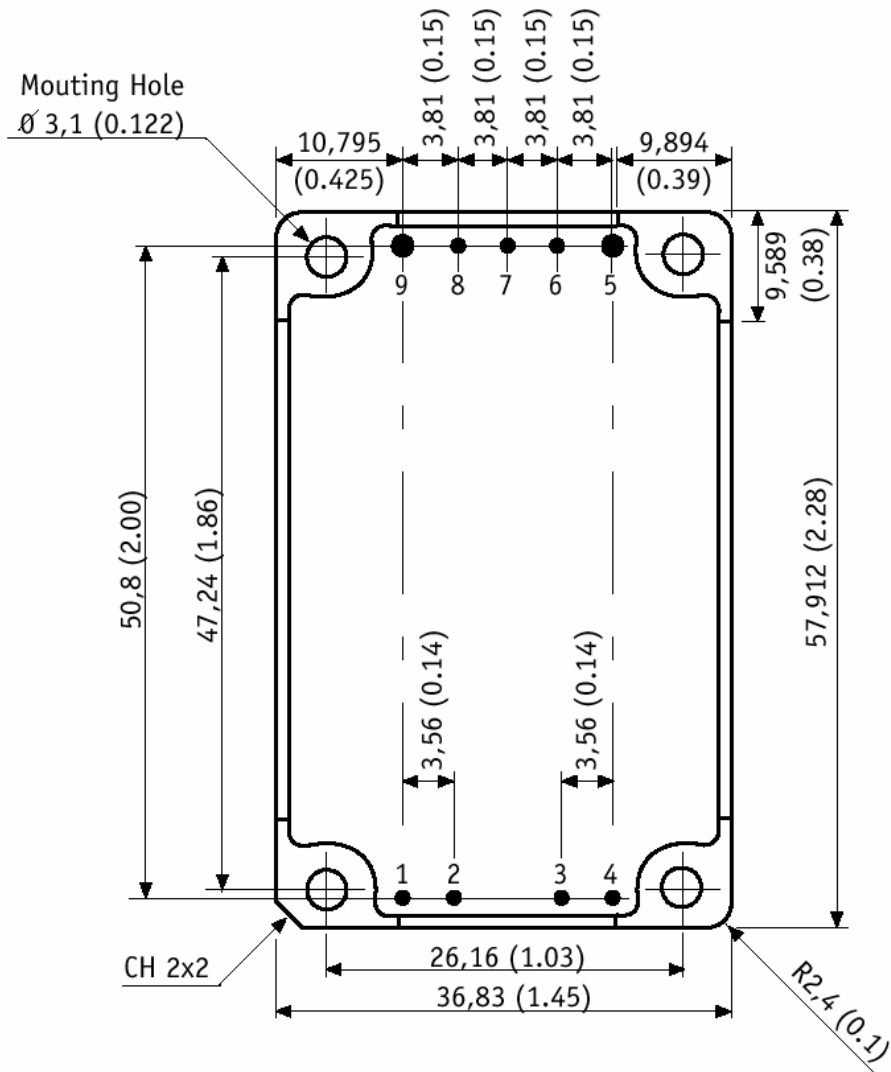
DC/DC converter measurements as seen from module bottom side, top side of the ACS-5175 board
